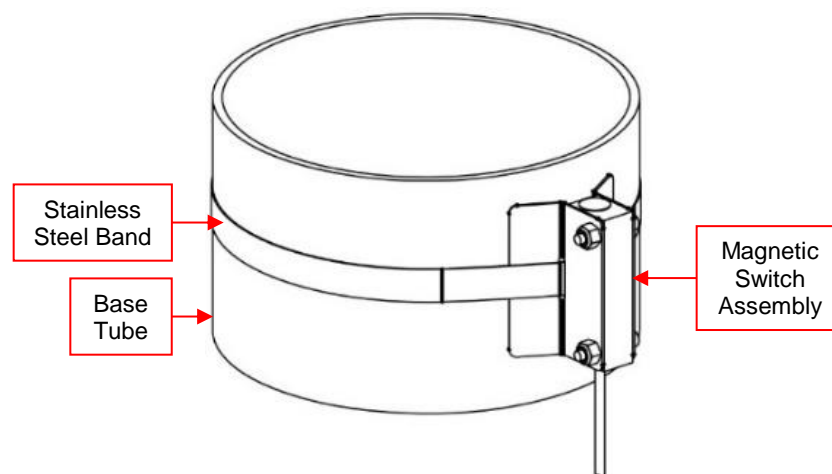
Magnetic Switch Assembly Attached to Base Tube
